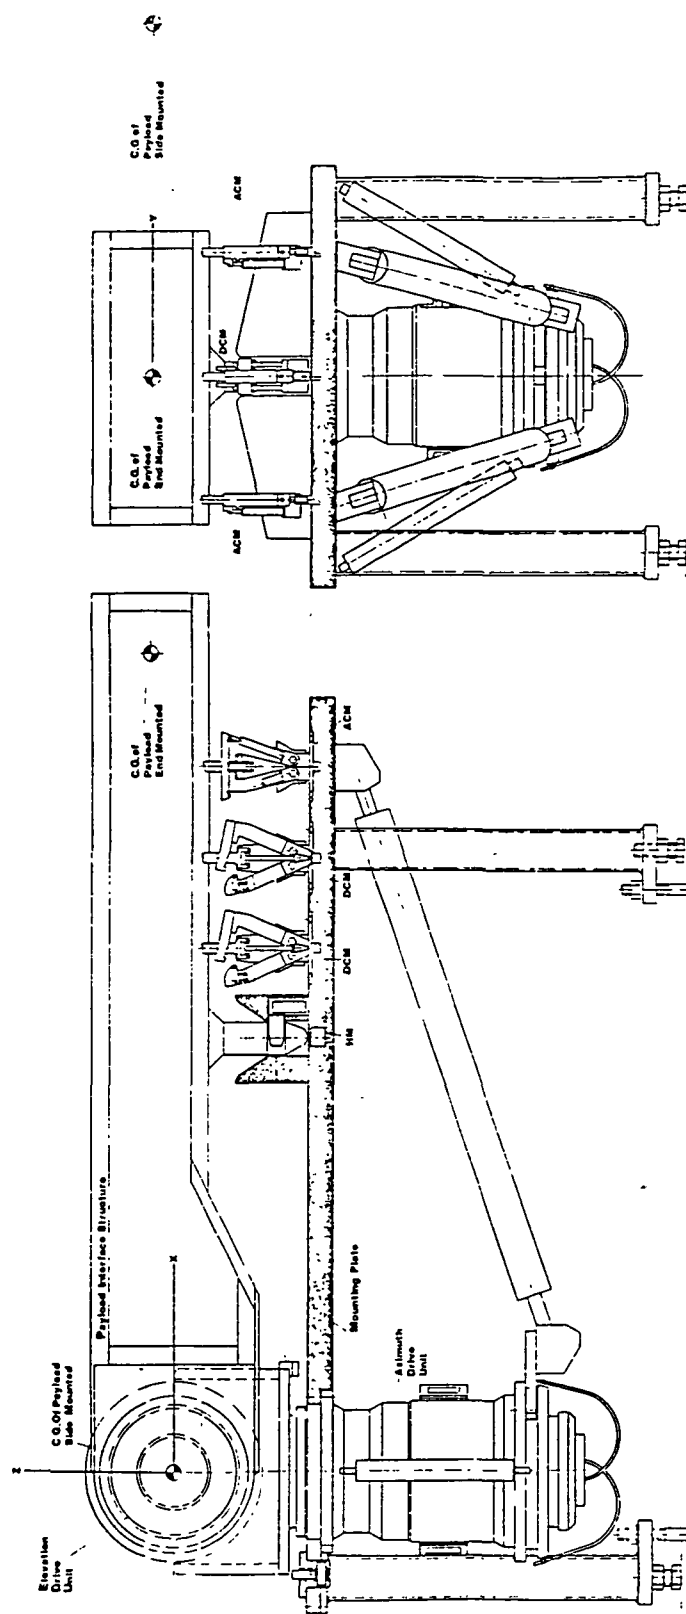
PHM GIMBAL ASSEMBLY
